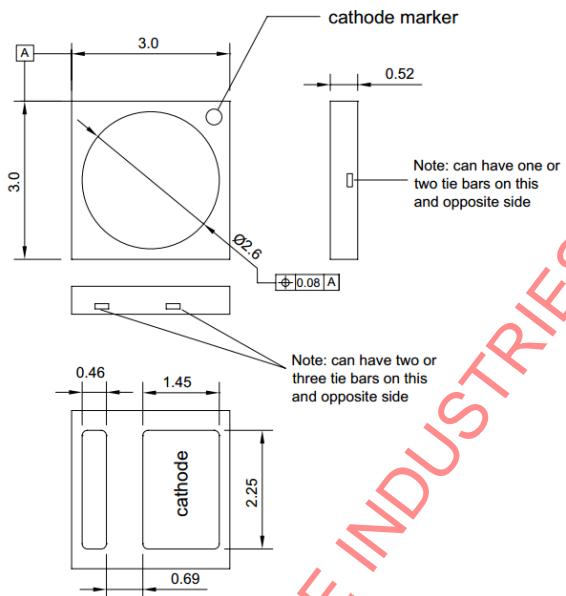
Mechanical Drawing for LUXEON 3030 2D. All dimensions are in millimeters.
